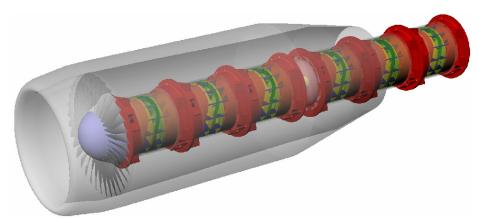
Solid model of PAX 50 axial vane hybrid engine assembly.
